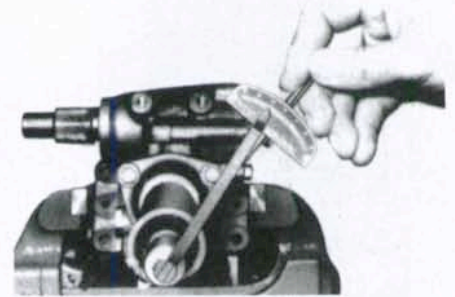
As a final assembly check, measure torque required to start rotation of worm shaft. Torque should not exceed 1.7 N·m (15 in.-lbs.)
